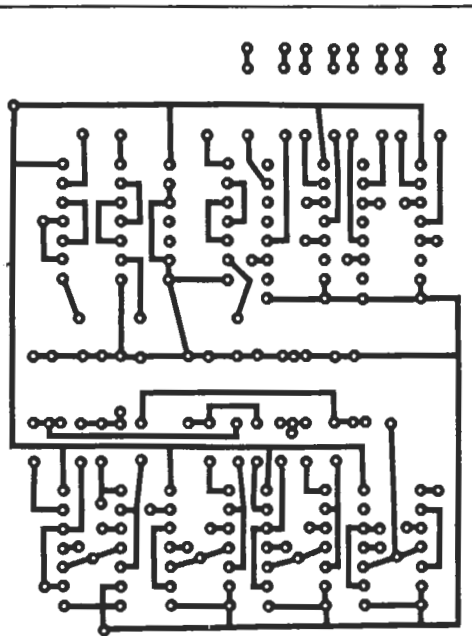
Either a perf board or printed circuit board can be used for the circuit. Note how the C-D-R assembly is made. Be sure to install the jumpers.
